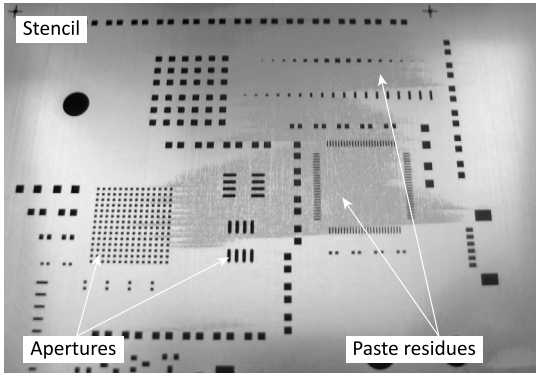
Solder paste residues on the surface of the stencil because of inappropriate support.
